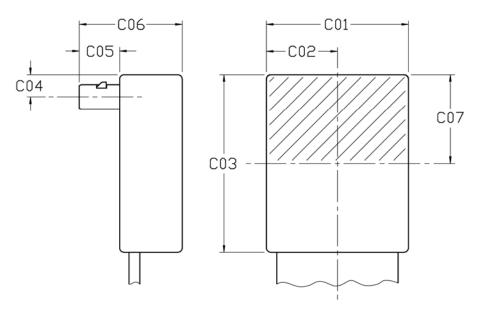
RIGHT ANGLE CABLE EXIT INTERNAL CABLE ASSEMBLY
